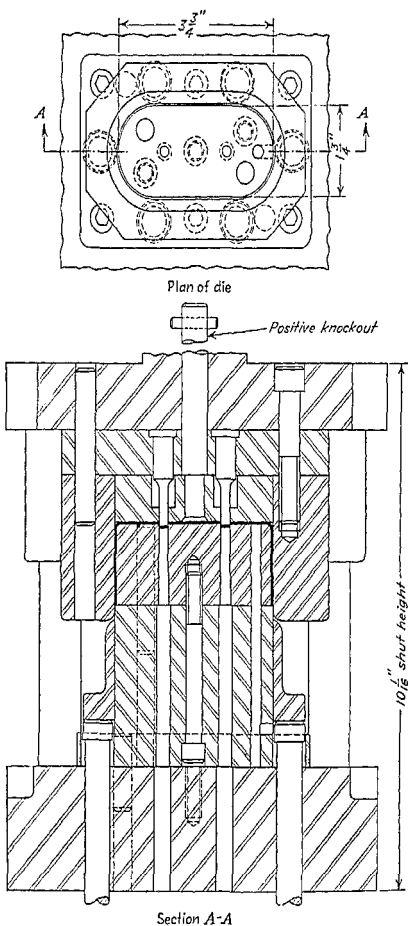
B. Die for redrawing and pinch-trimming the oval can of Fig. 11-40A.
